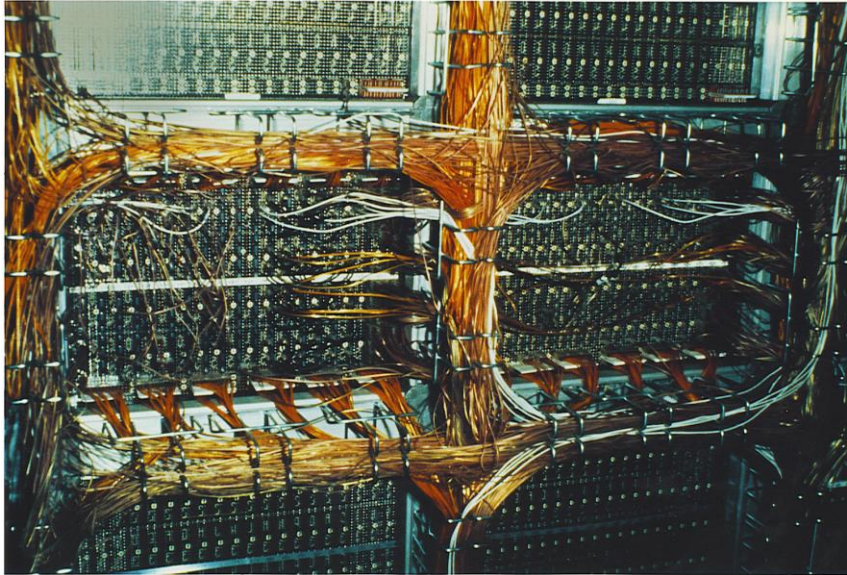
The circuit boards of Figure 2 were plugged into larger boards with extensive hand wiring behind the boards to provide interconnections. Advances in packaging moved these connections to the back-end-of-the-line (BEOL) wiring on the chip or into the multi-layer ceramic module on which the chips were mounted.
